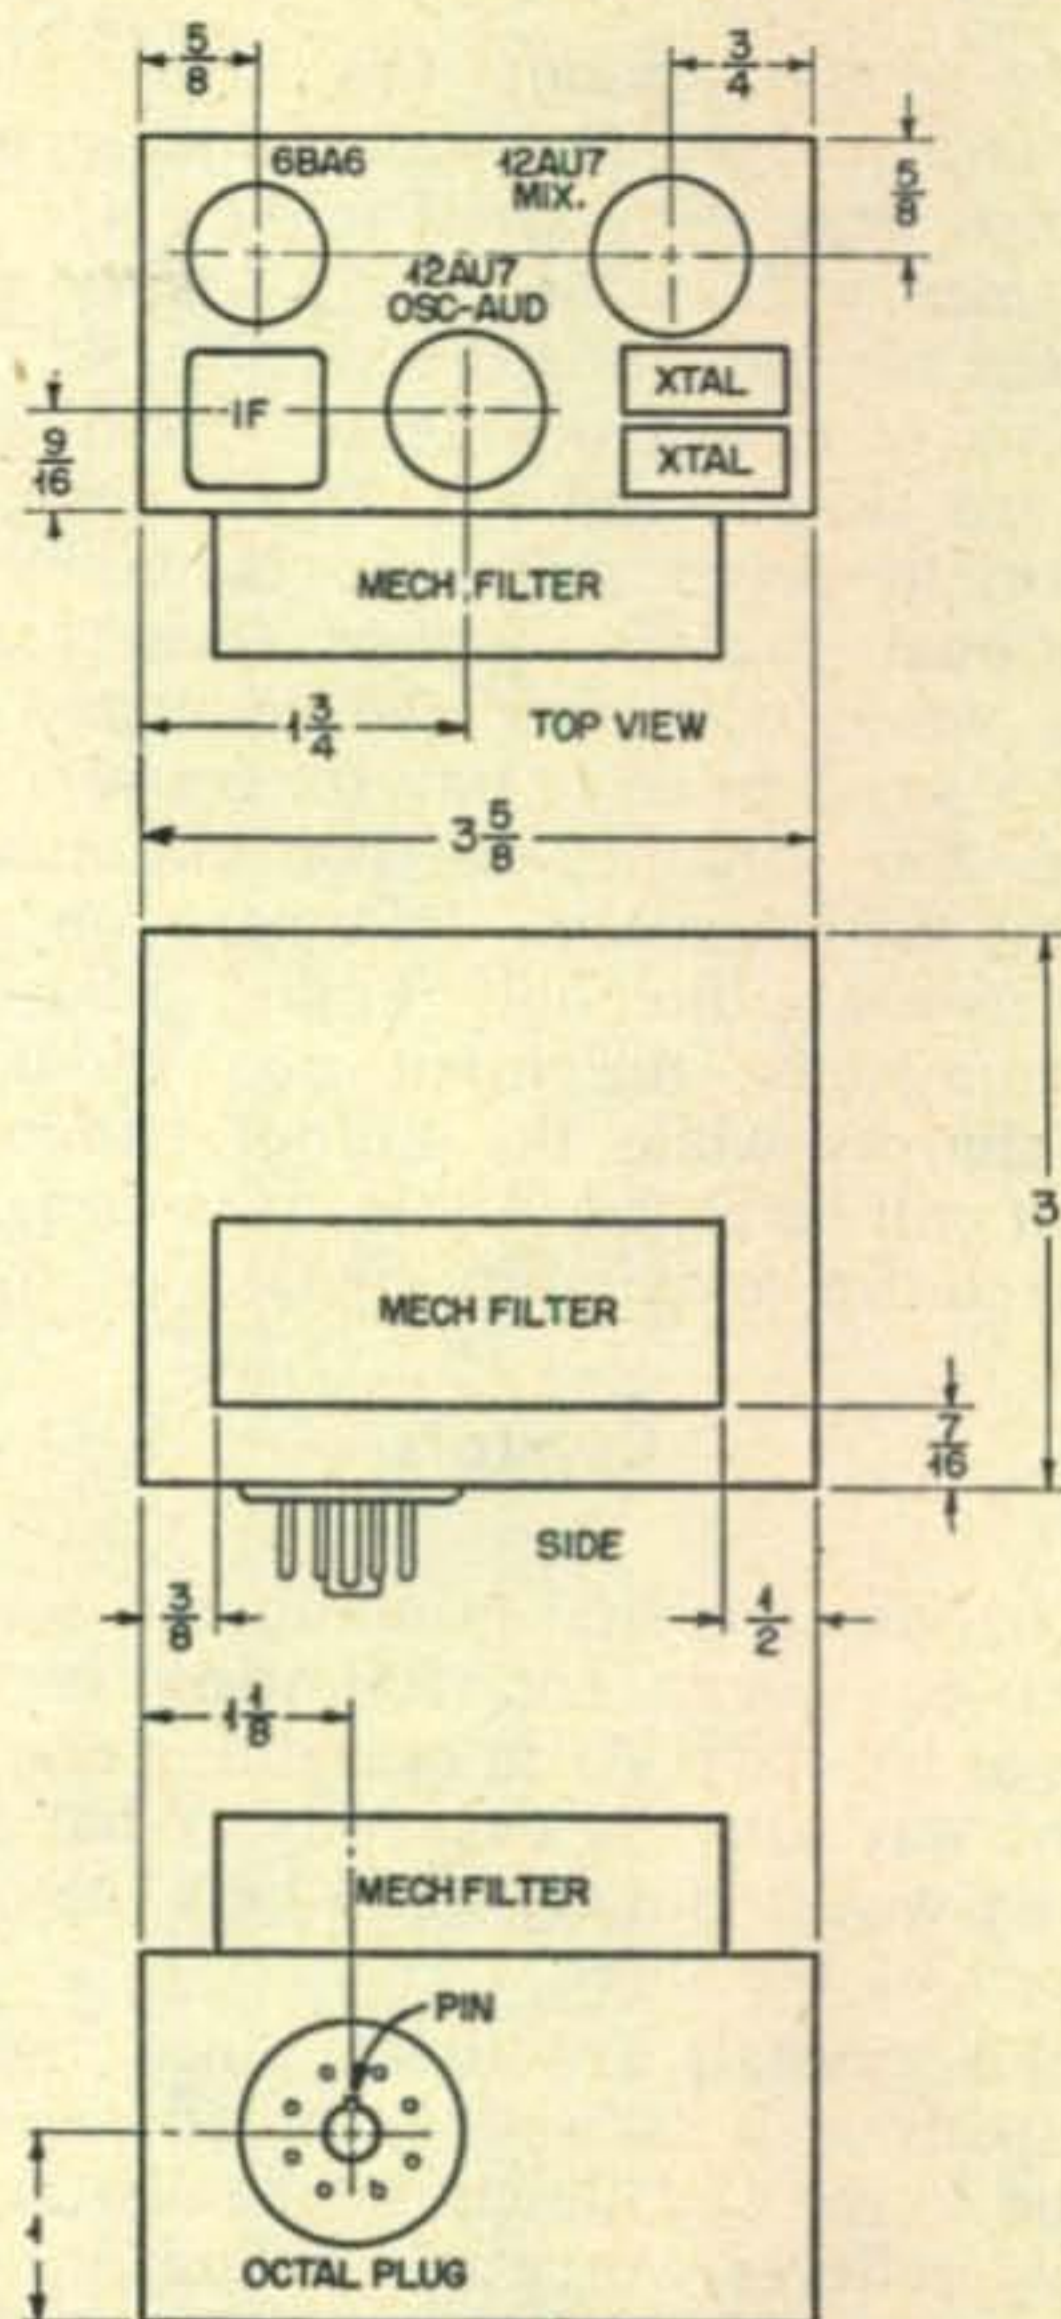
Chassis layout of the W6JPU SSB Adapter. Placement of parts is not critical, however this arrangement has worked out well.
